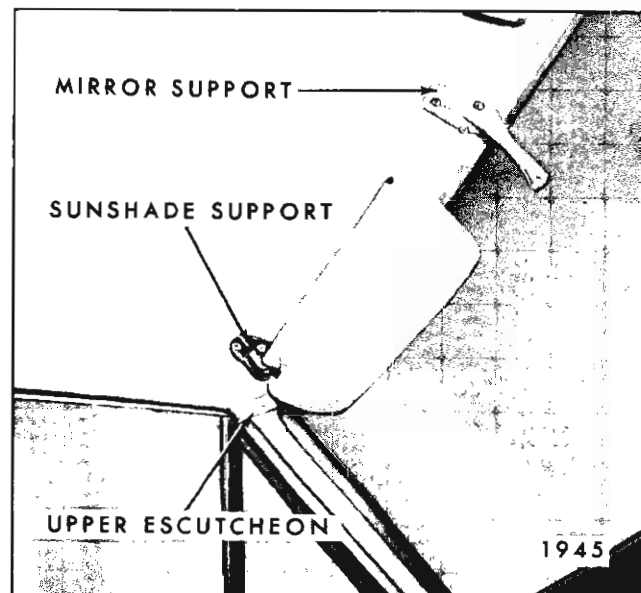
C2—Upper Trim Escutcheon Sunshade Support and Rear View Mirror Support
